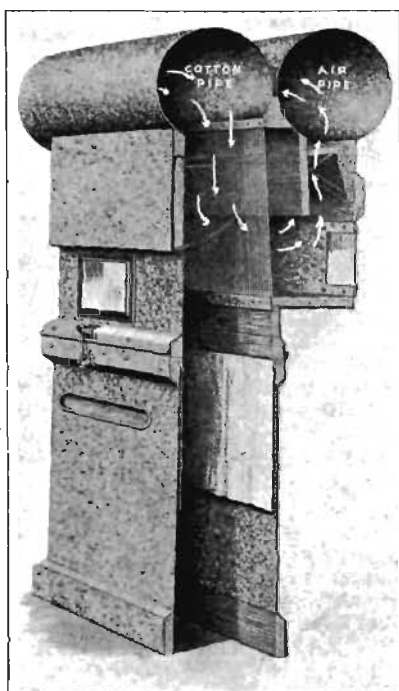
Sectional view of pneumatic elevator showing cotton and air pipes.
